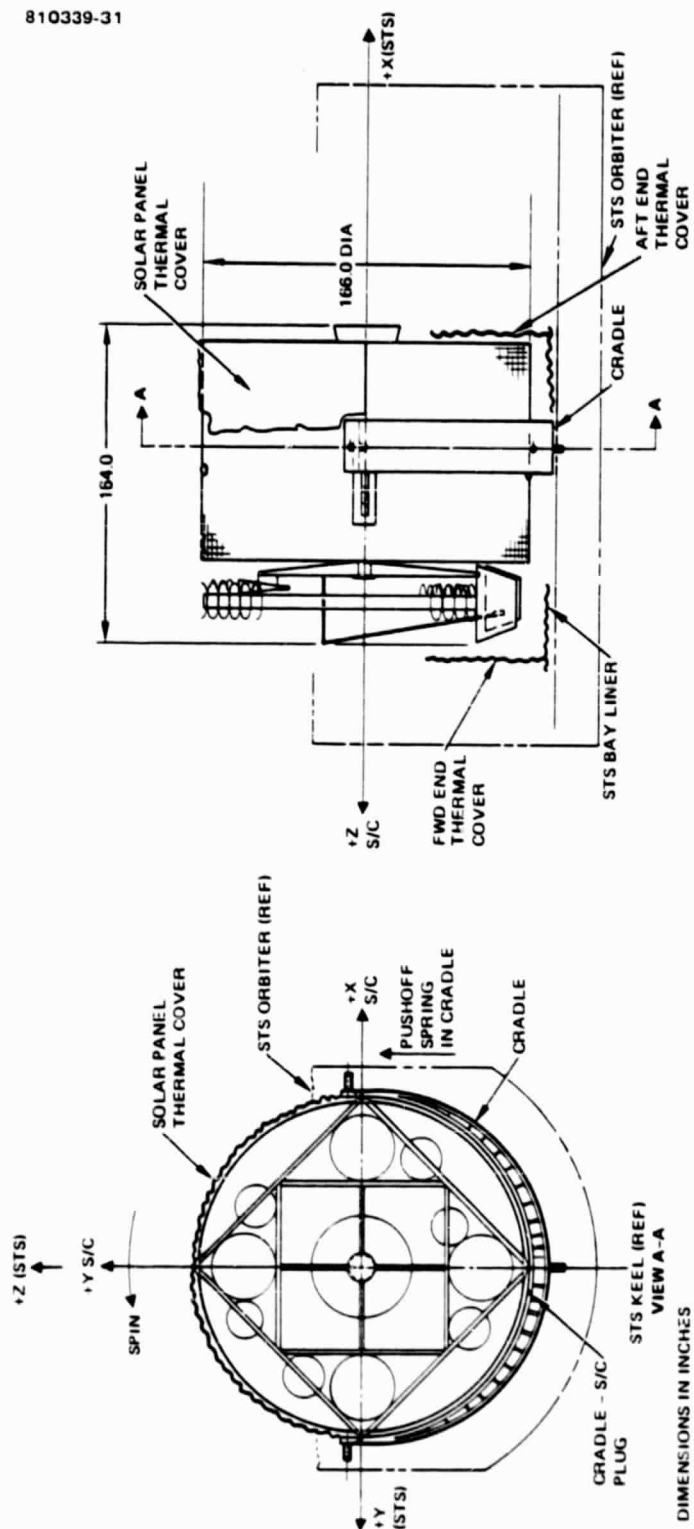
SPACECRAFT CRADLE ASSEMBLY
